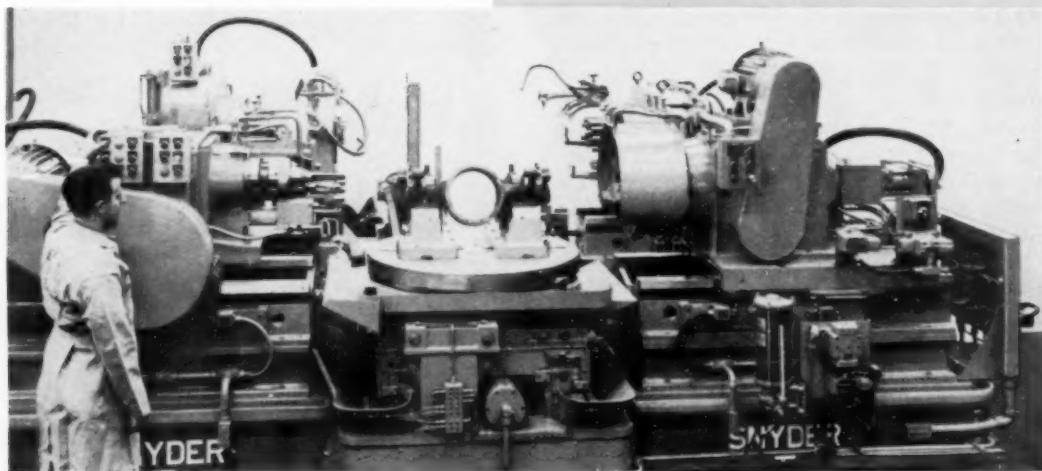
(below) Line-index machine for processing a variety of lift truck drive axle housings.
